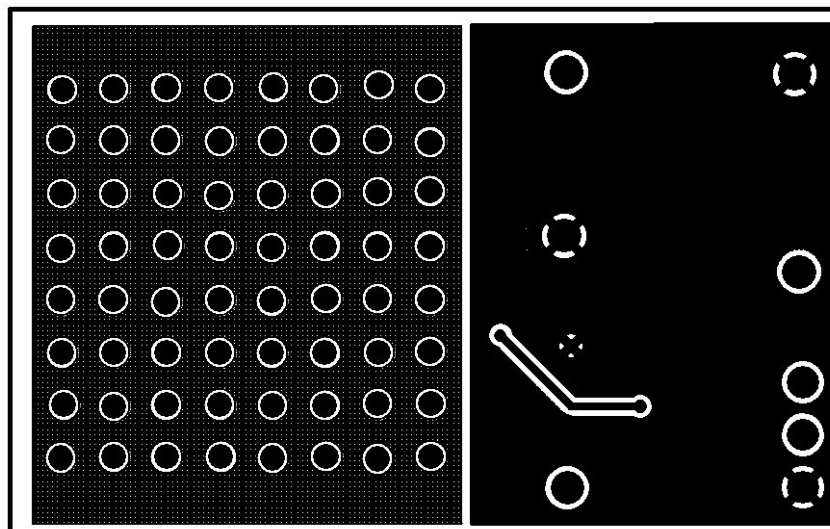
SP6652LEDEB PC LAYOUT BOTTOM SIDE
